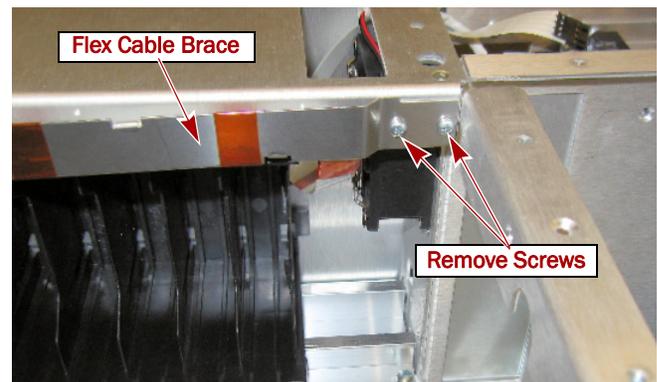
Location of the Flex Cable Brace Hexhead Screws
